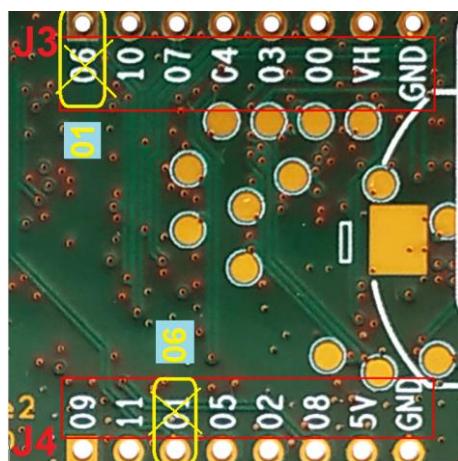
Wrong label on mikroBus™ pin assignment (bottom view)
